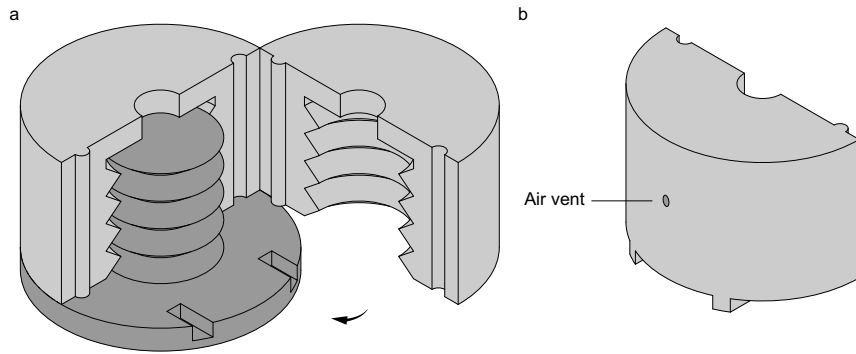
(a) The three-part 3D printed mould used to fabricate the HEB actuator. (b) One of the outer halves of the mould indicating the air vent.
